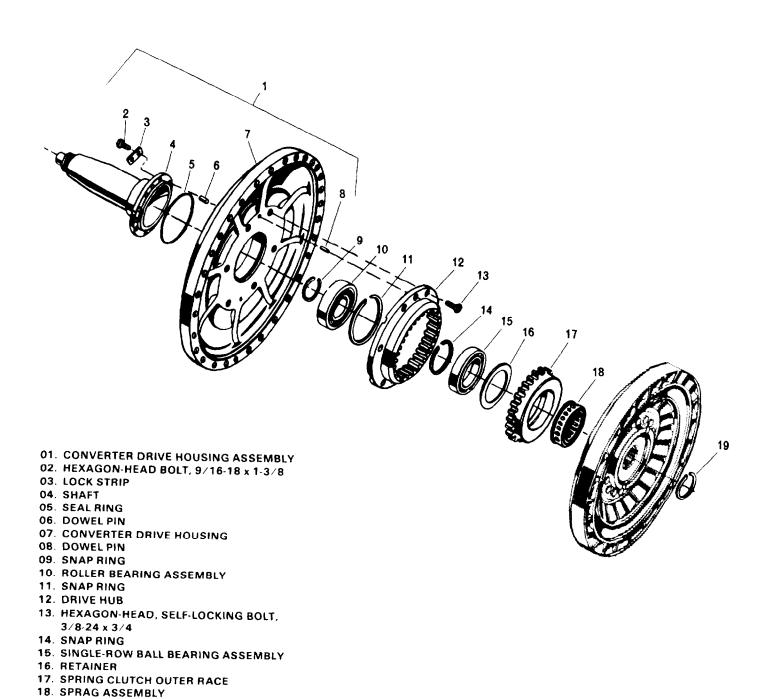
C-40. Exploded View of Converter Drive and Sprag Clutch
